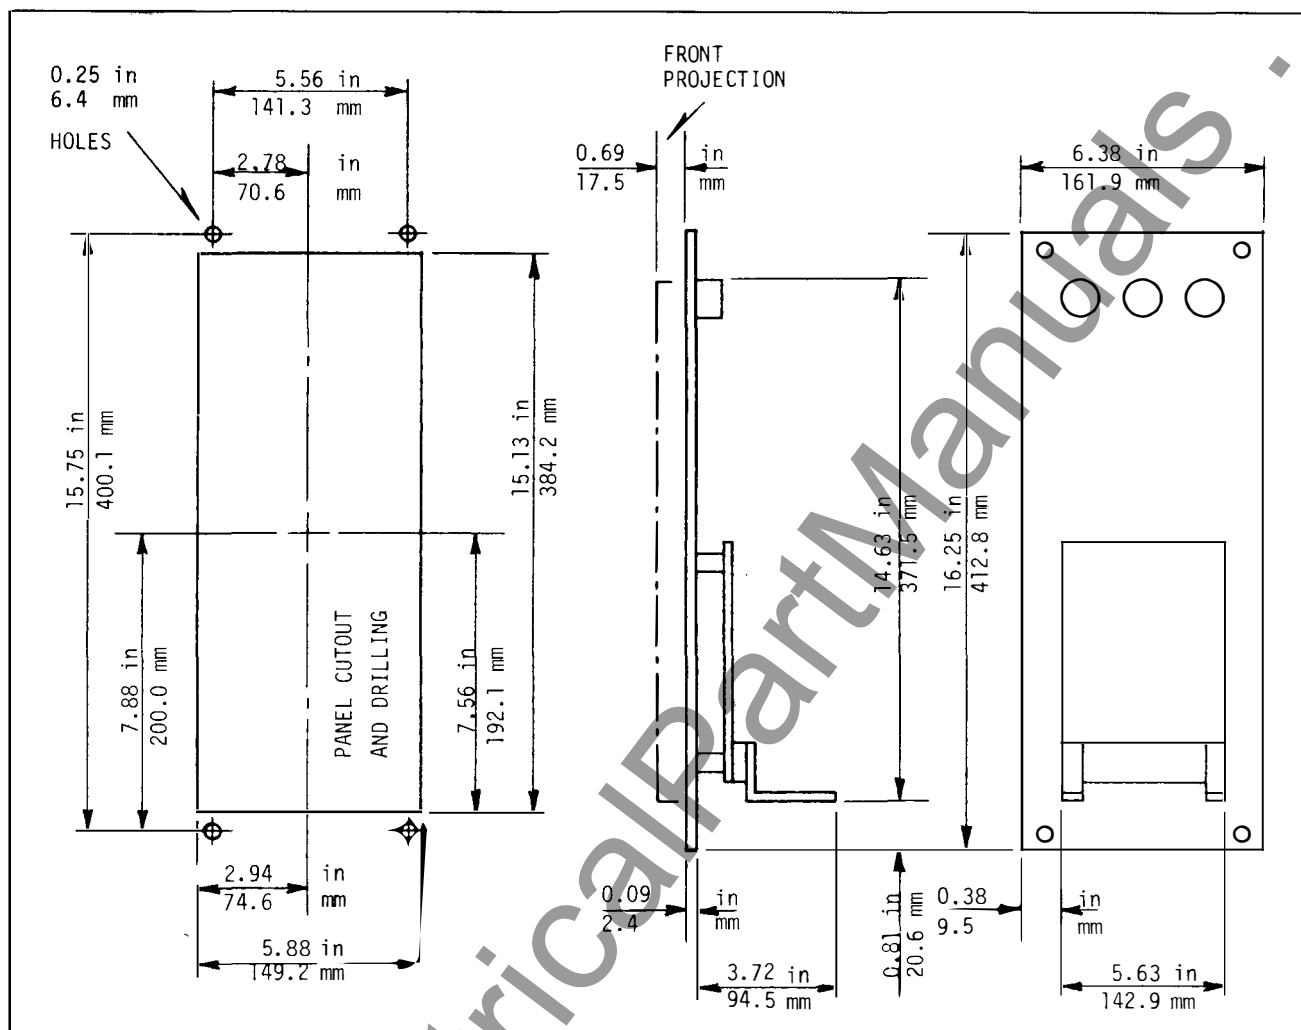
Outline, Panel Cutout and Drilling for Type SVR Relay
